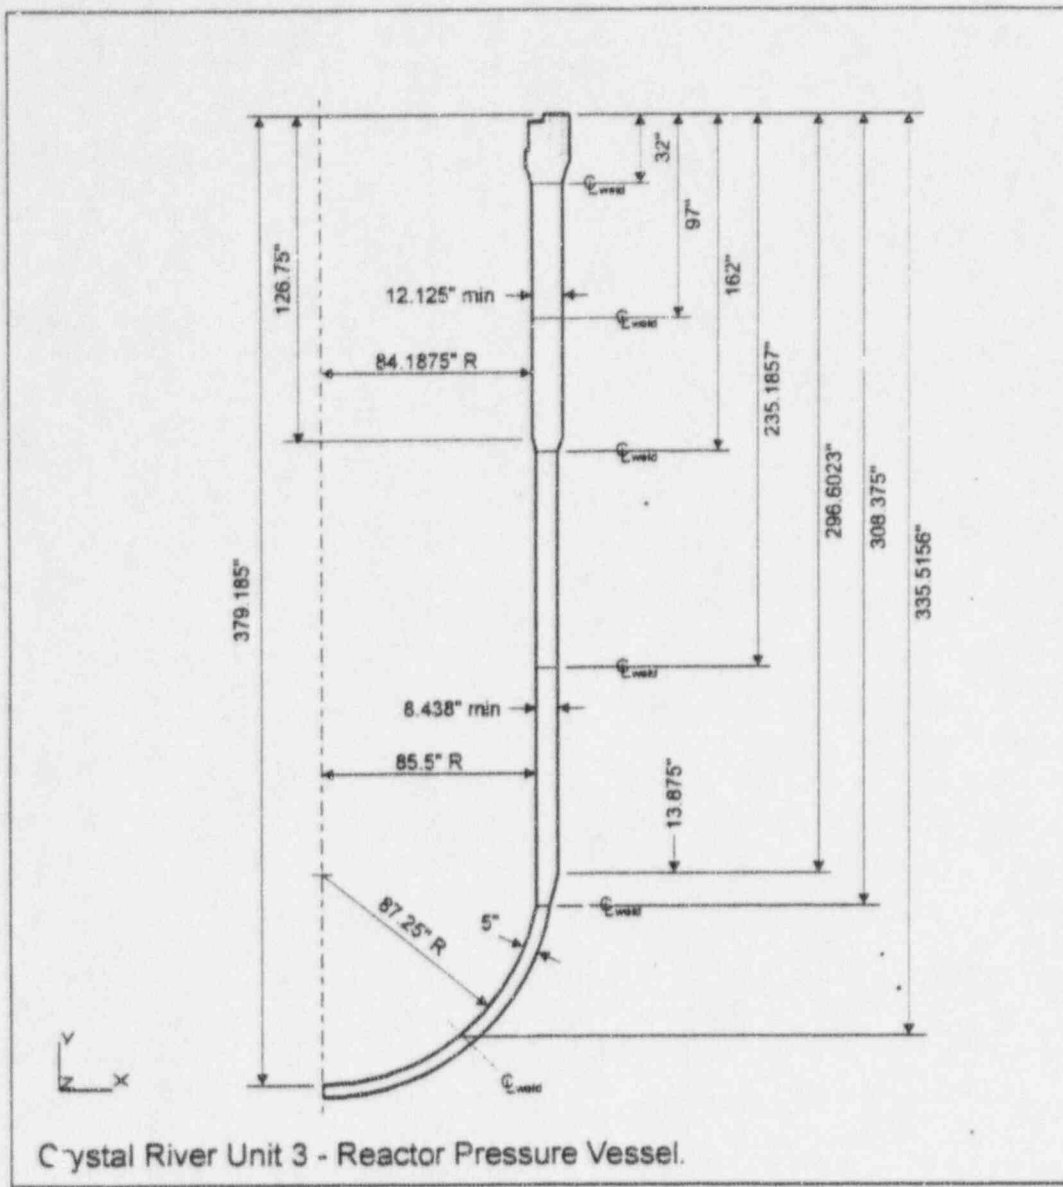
Vessel Geometry at CR-3 - Beltline and Bottom Head Regions
